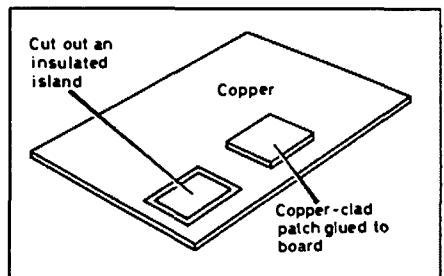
Connection point on the copper side can be arranged by cutting away the copper to form an insulated island (use a sharp hobby knife for this), or by gluing a small patch of copper-clad board on the copper side. (Courtesy RadCom).
